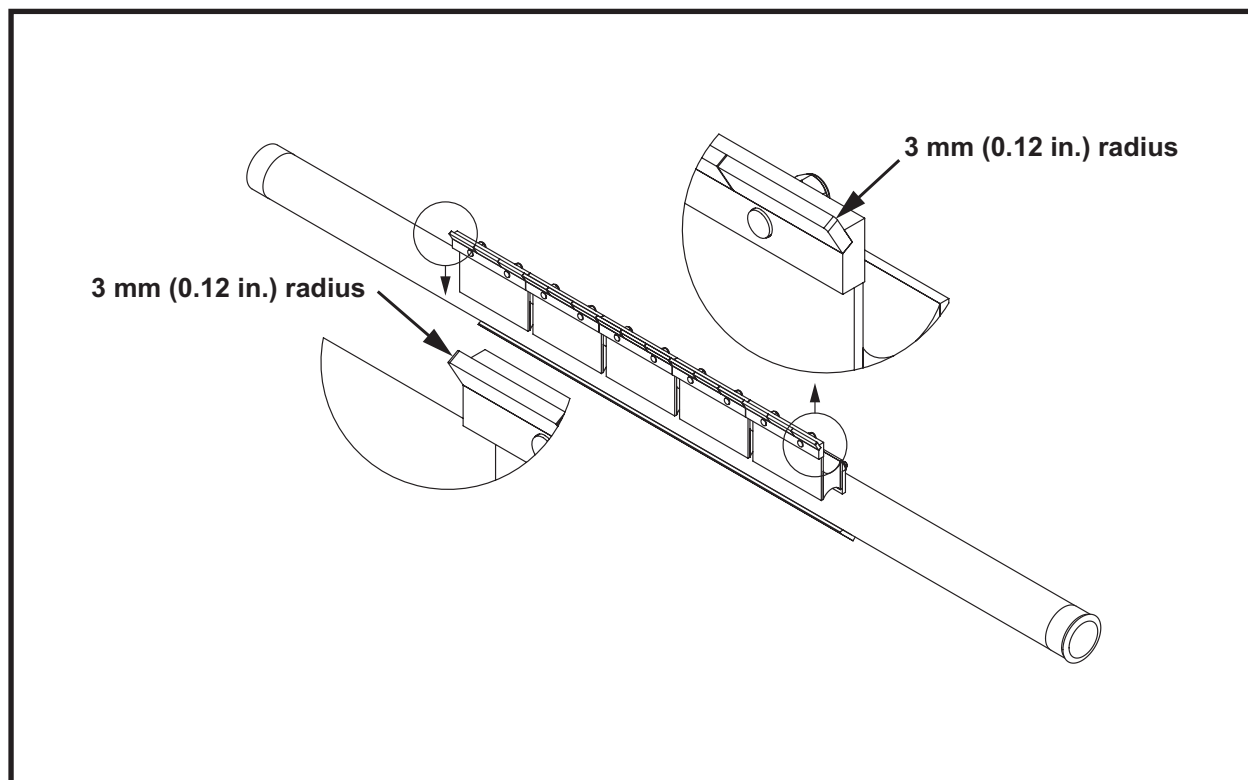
Martin® P2 Secondary Belt Cleaner HD Tip Grinding Locations
